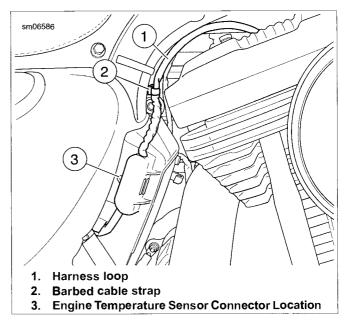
Engine Temperature Sensor Harness: XL Models
